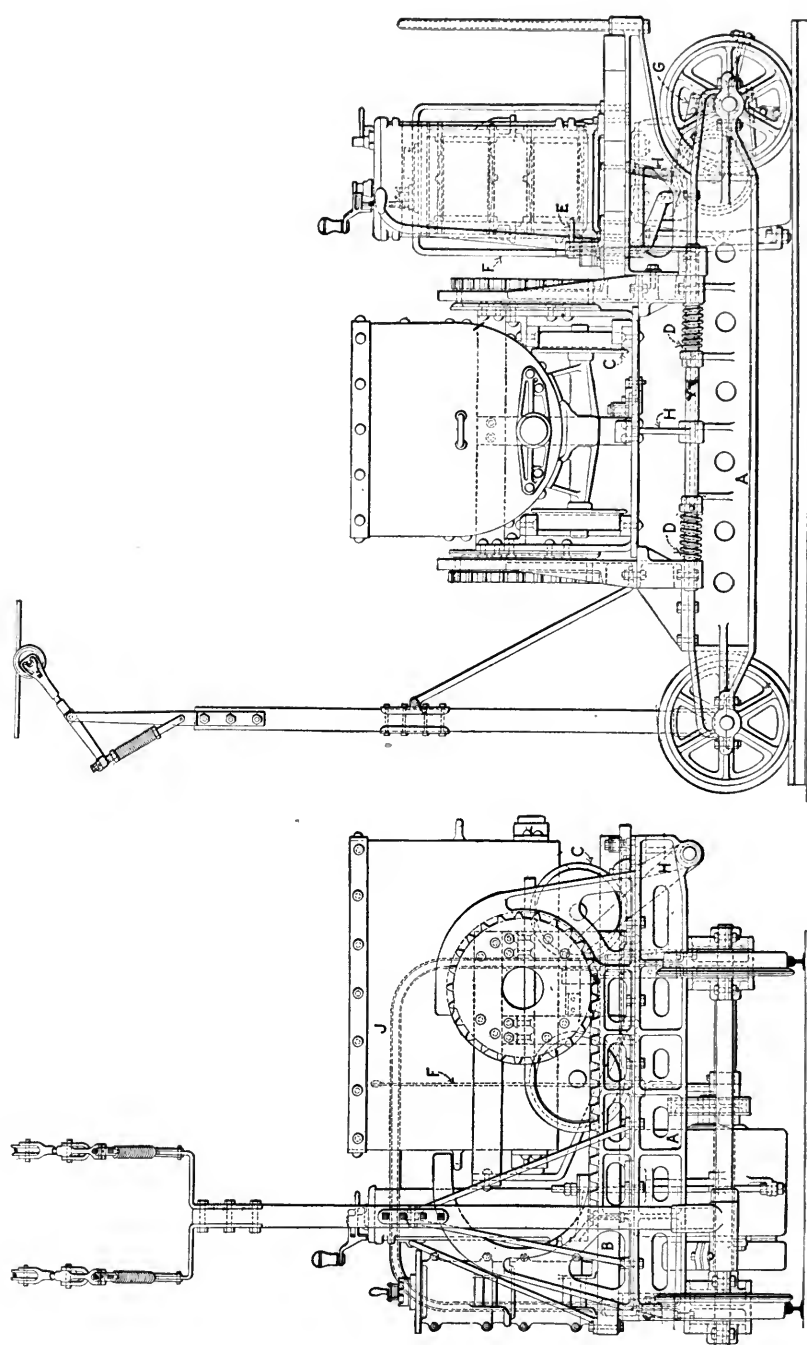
TRANSFER CAR USED IN SOUTHEASTERN MISSOURI.
